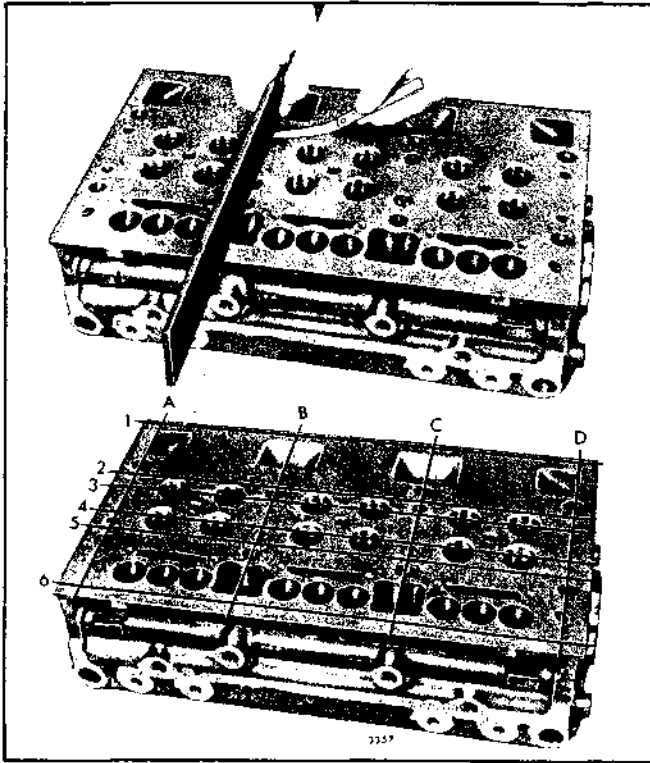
Checking Bottom Face of Cylinder Head for Warpage
